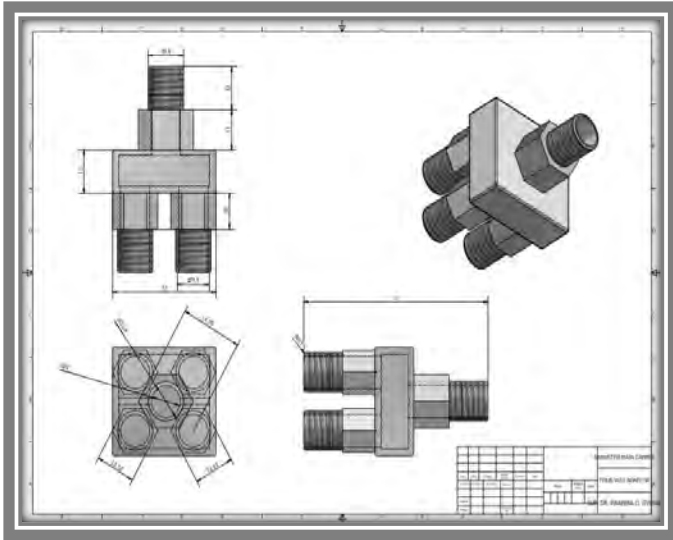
SN 46: Four-Way Adapter for Movable Wheel Port/Pump/Motor
